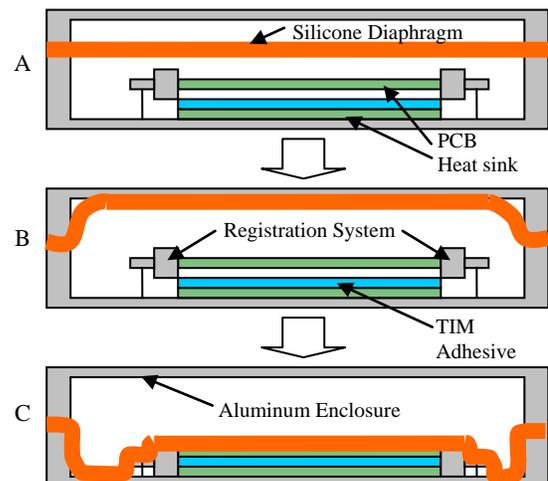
Schematic of the DVPL lamination process. (A) Atmospheric pressure in both chamber of DVPL with the PCB separated from the adhesive by the registration system. (B) Vacuum drawn in top chamber of DVPL. (C) Vacuum drawn in bottom chamber and top chamber vented to atmosphere. Silicone diaphragm has descended, mated the PCB to the adhesive, and is applying pressure to the assembly.
